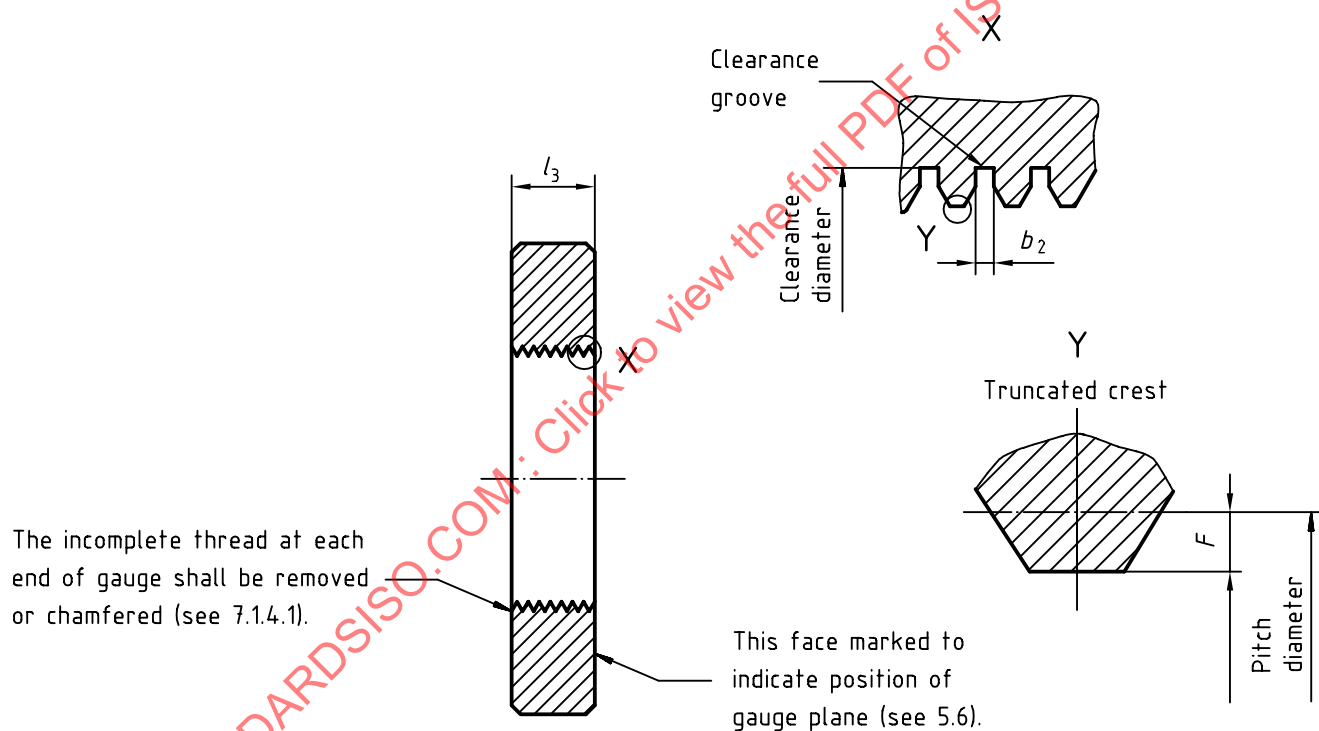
Parallel modified thread form check ring gauge (gauge No. 6)
